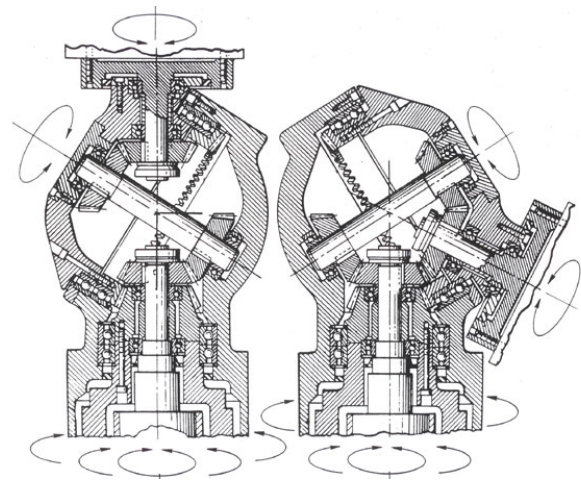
A section view of a robotic wrist that uses angular bevel gears[10].
